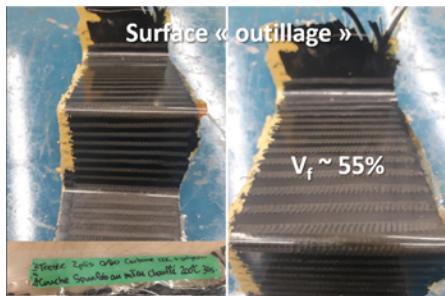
Example of a Z-section composite part, preformed and moulded through vacuum infusion.
